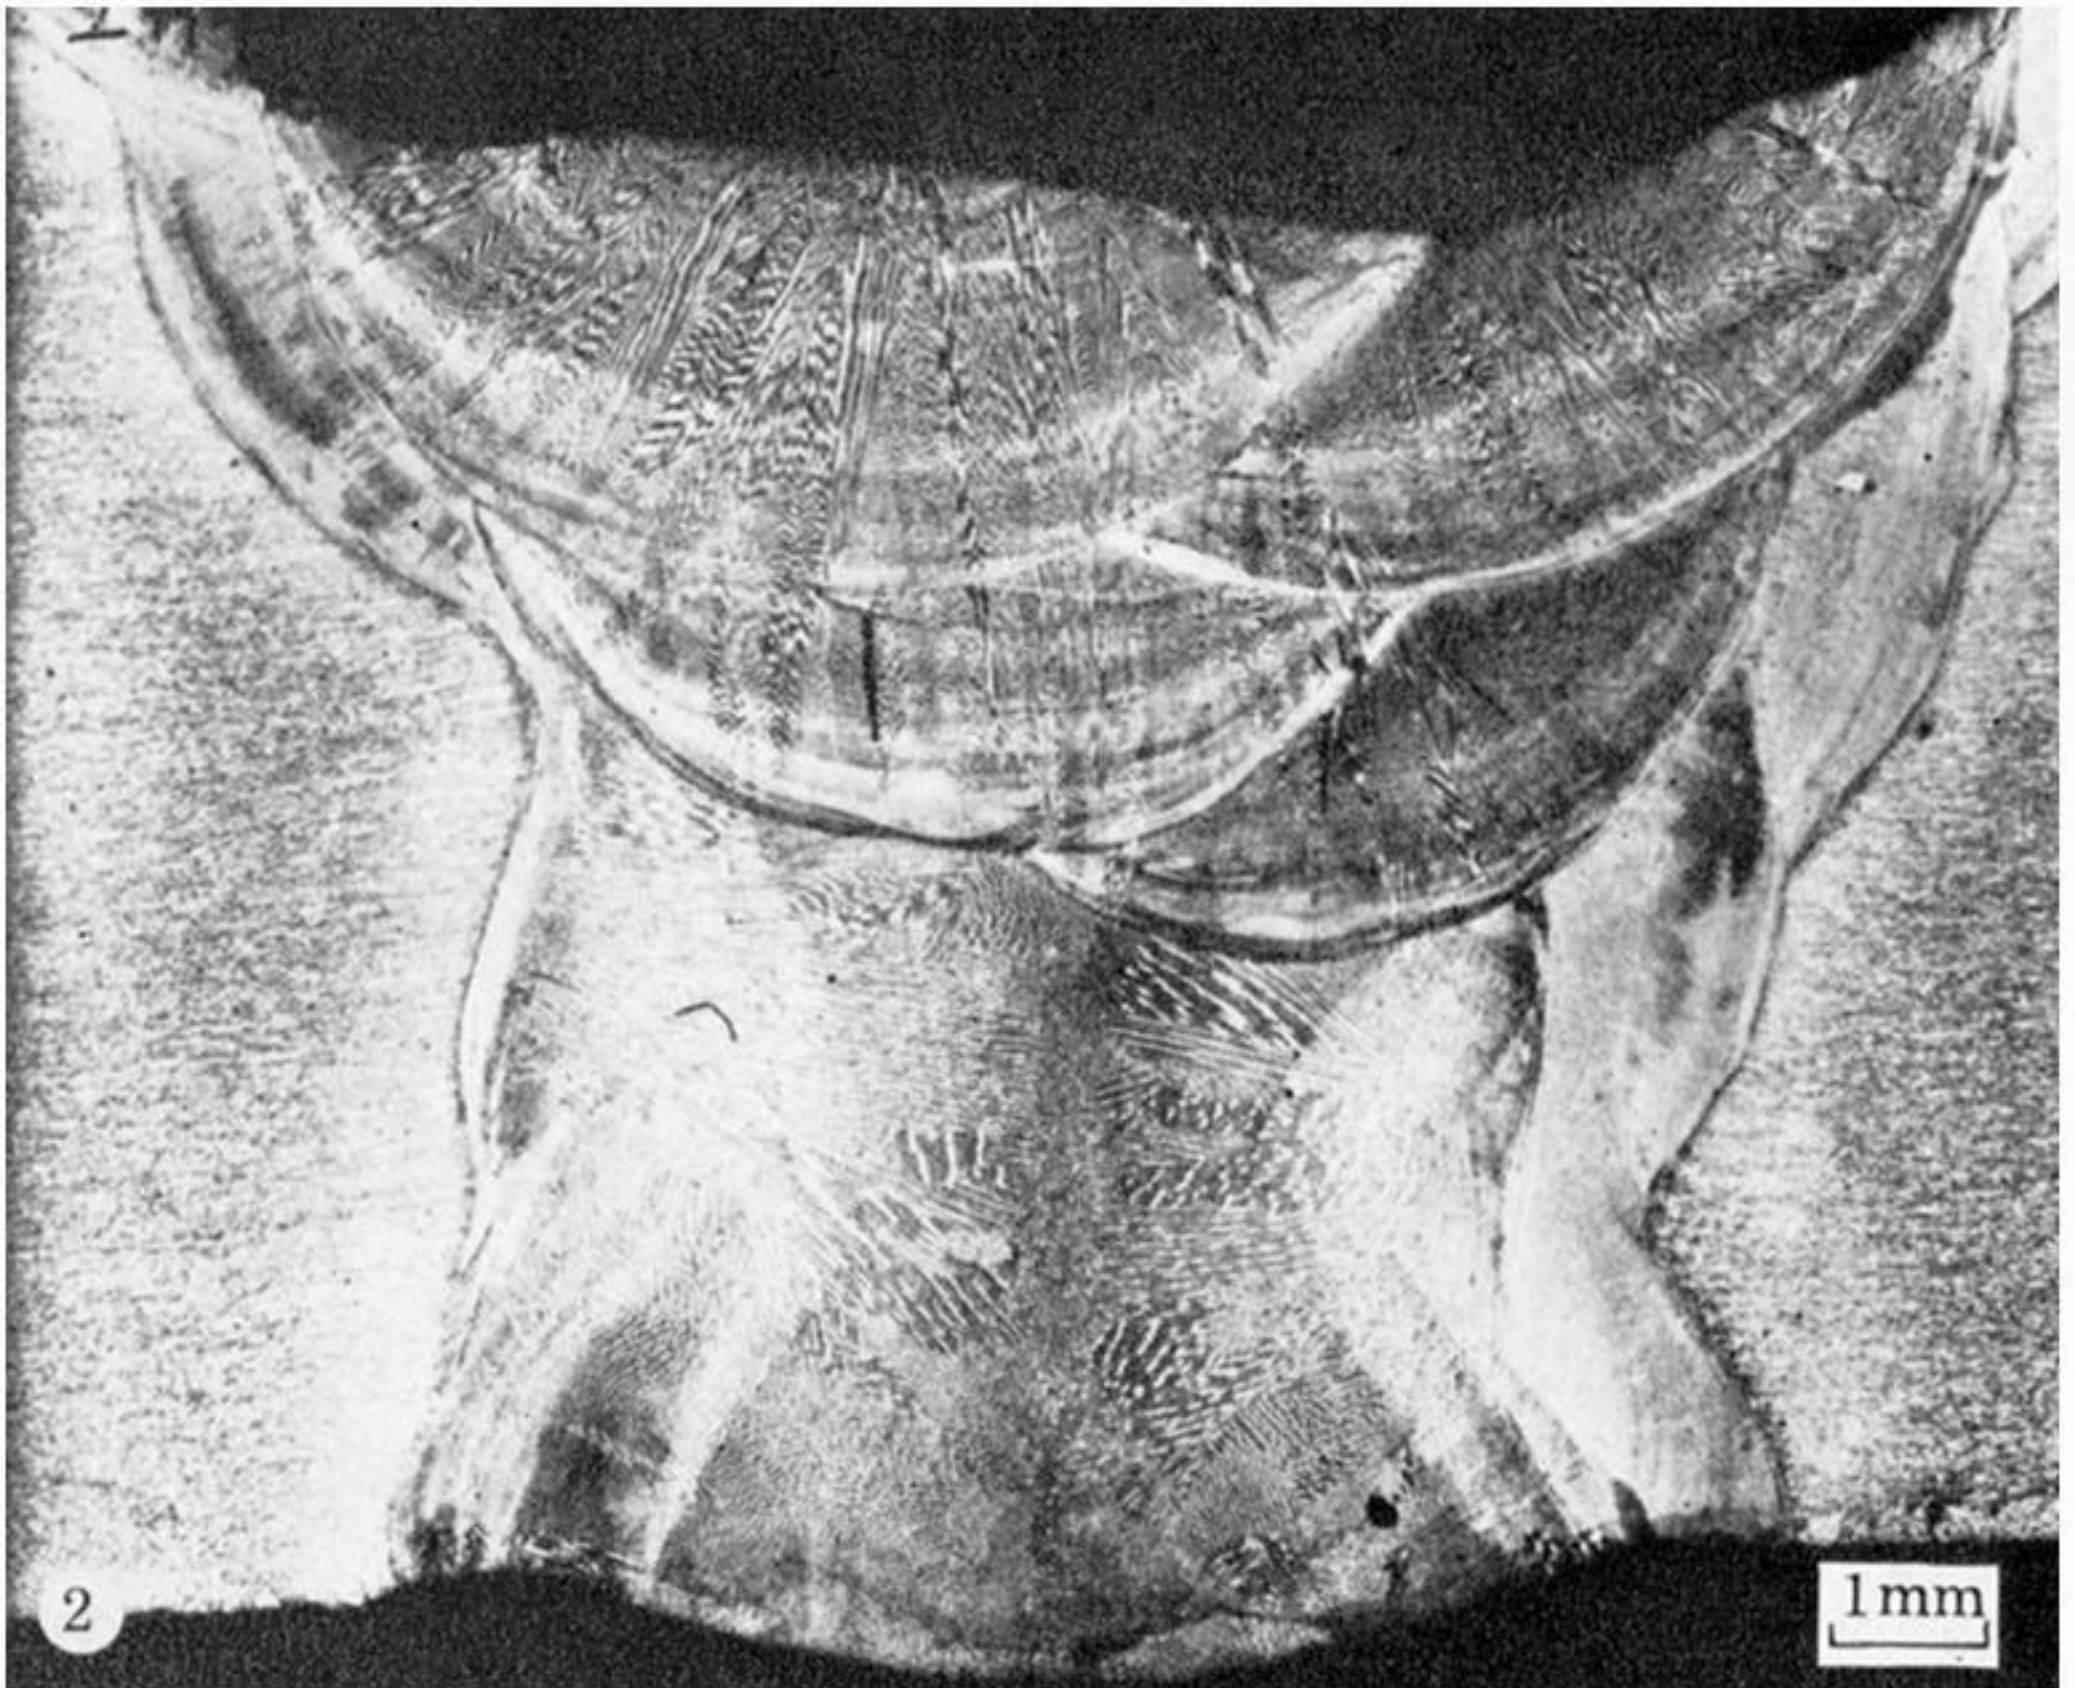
Liquation cracking in austenitic stainless steel weld metal, type 316.
